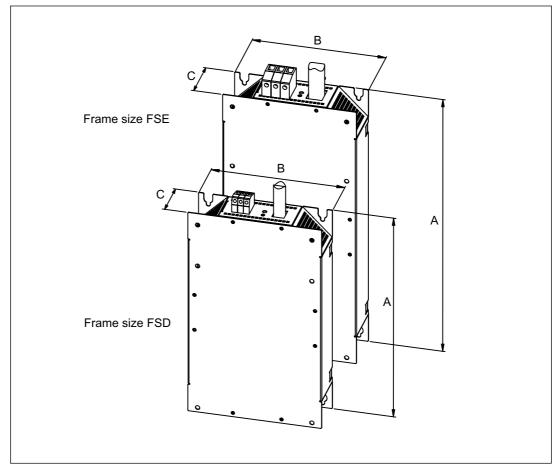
Dimension drawing of line reactors, frame sizes FSD and FSE
